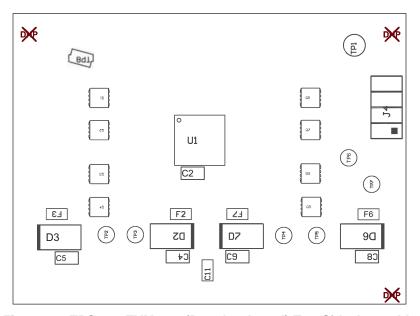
TPS2388EVM-016 (Daughterboard) Top Side Assembly
